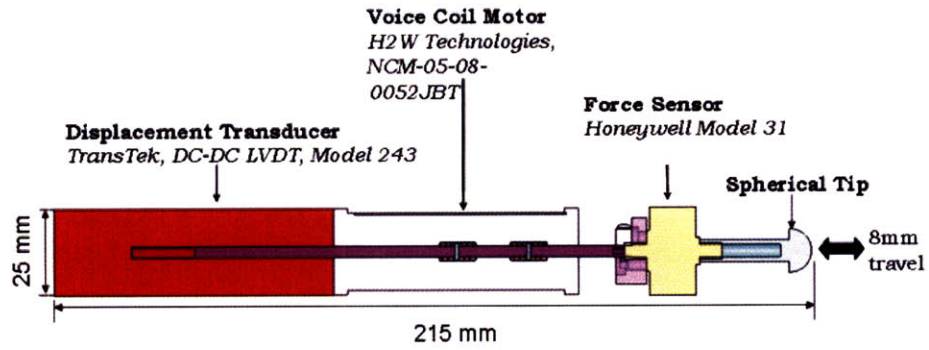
A cross-sectional view of the in vivo dynamic indentation tool
